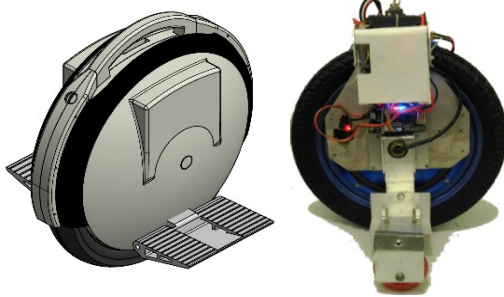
Mechanical design (left) and realization without the case with support wheels (right) of PENS-Wheel
